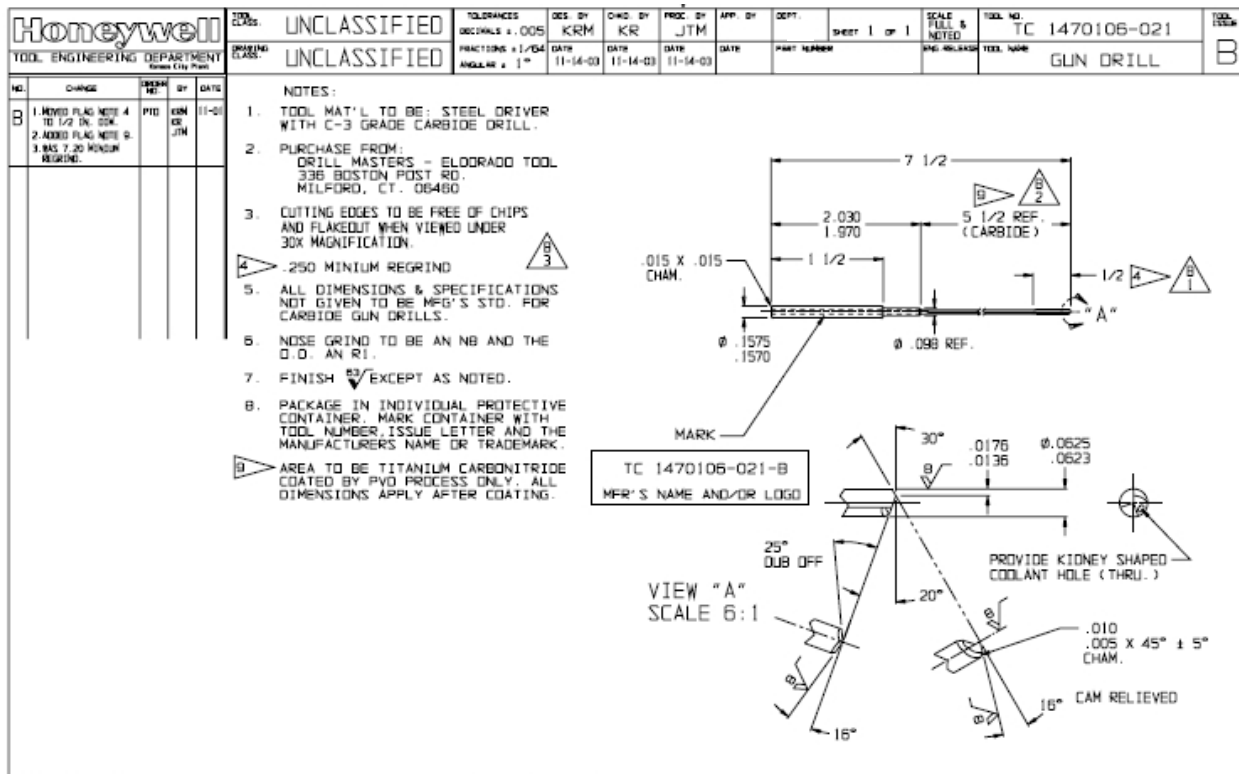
Drawing of gundrill, TC1470106-021B, used in another department for drilling of GTS components.
